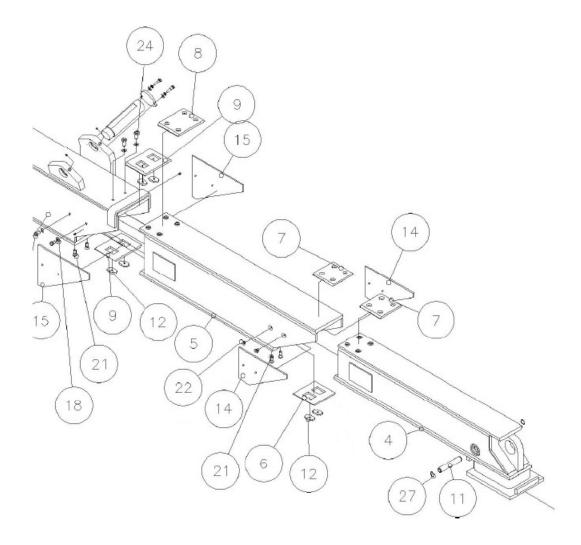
DISASSEMBLING THE OUTRIGGER (CSR50)
